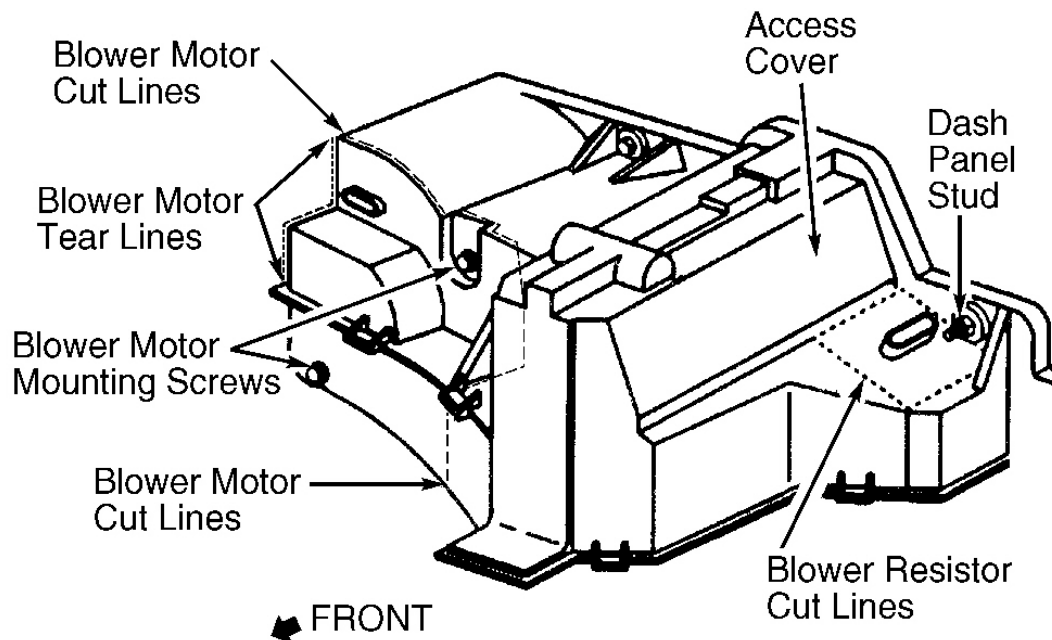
Identifying Blower Motor Resistor Assembly (C42)
